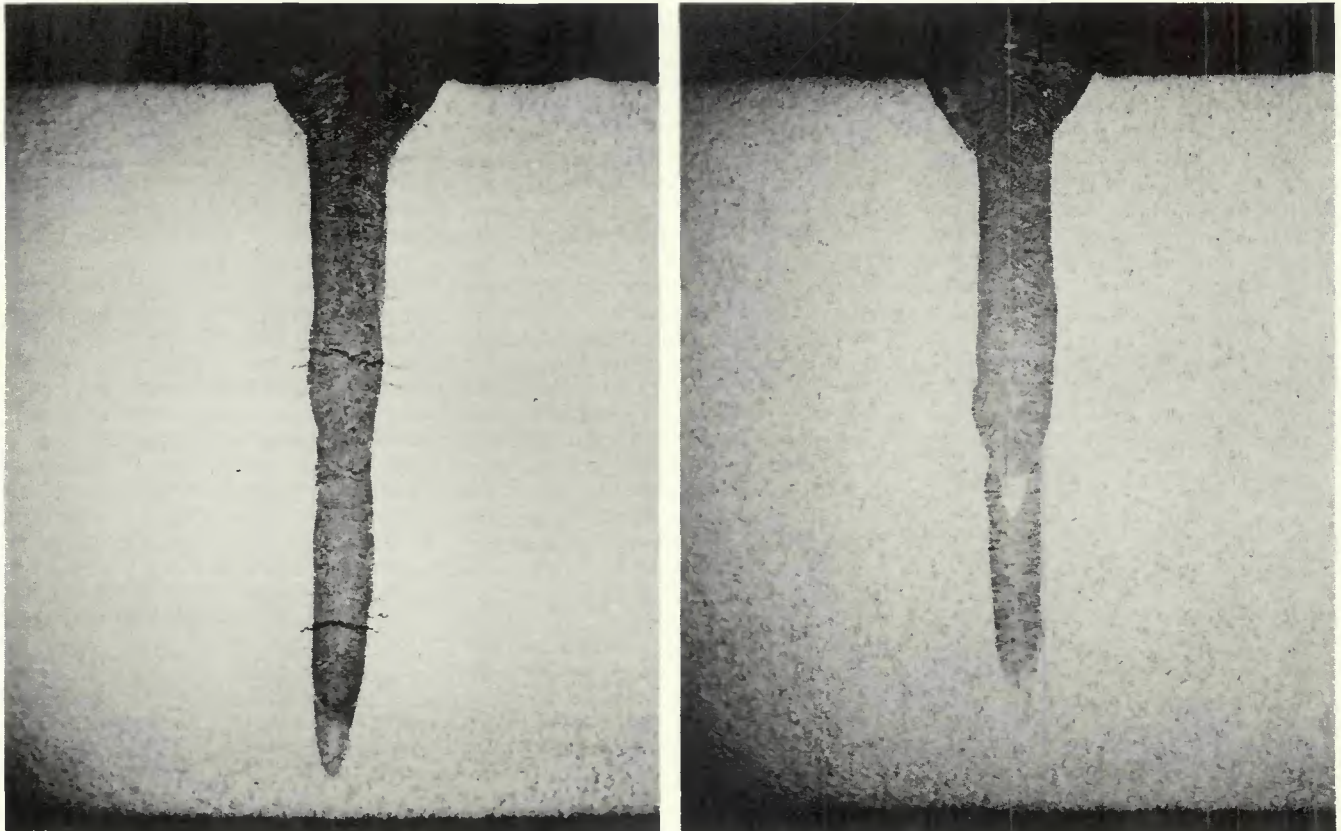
Partial penetration EB welds in 0.25 in. plate showing weld overlap. (Left) — Heat 2 exhibiting gross cracking. (Right) — Heat 6 free of gross cracks
